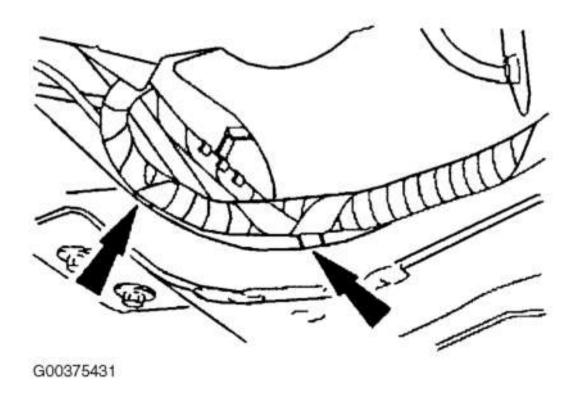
Locating Wire Loom At Crossmember Courtesy of FORD MOTOR CO.
